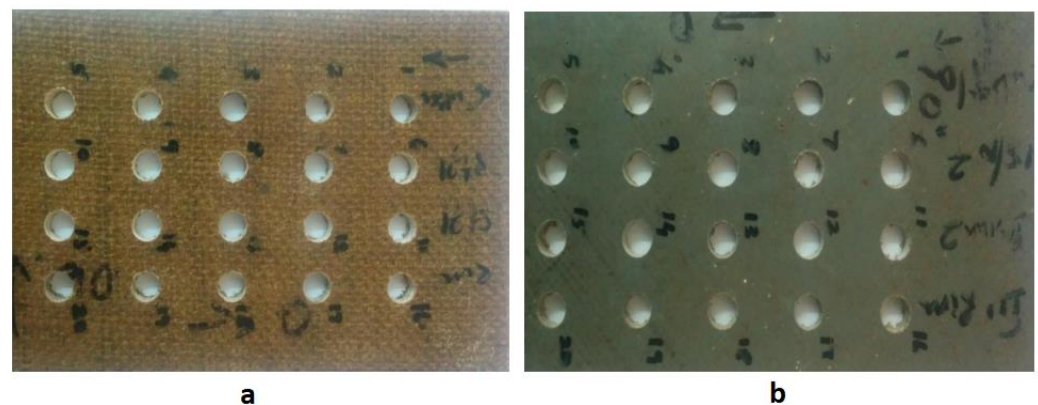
Front view of specimens with holes of different diameter before and after tensile test [76].
